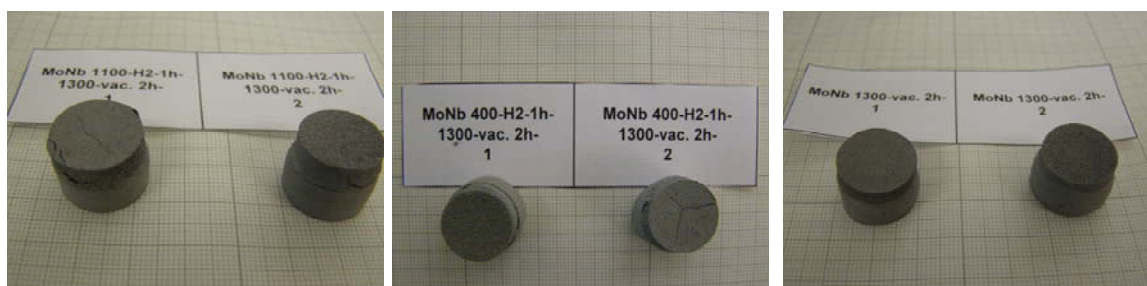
left and center image: layered samples which suffered from cracks after sintering (sintering profiles 2 + 3); right image: samples sintered in vacuum without any cracks (sintering profile 1)
